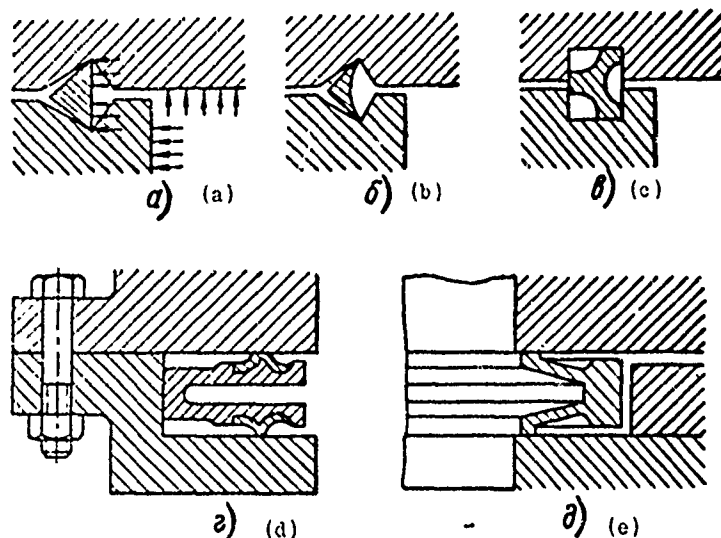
Connections: a, b, c, - with shaped metal gaskets; d, e - with spring gaskets.
